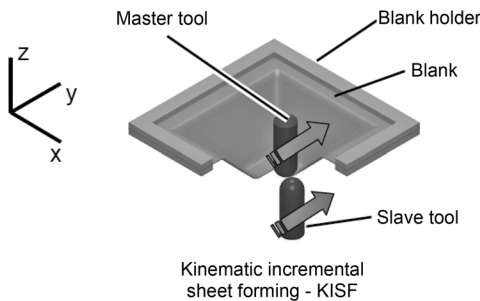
Kinematic incremental sheet forming using two forming tools. Source: Ref 13.2
